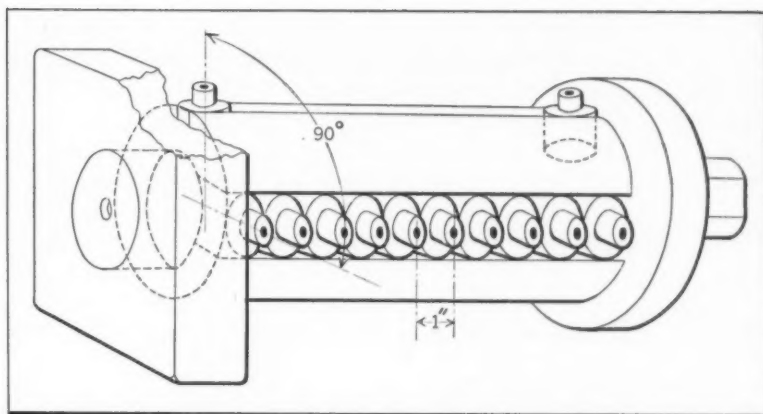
Test Bar Used for Calibrating the Helical Lead Checking Machine
